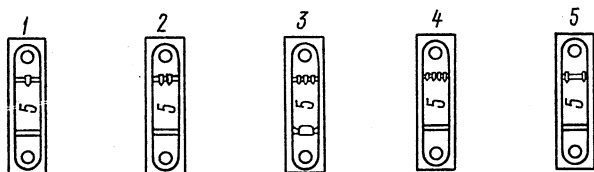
Marks on Main Bearing Caps (bearings are counted from engine front) and Cylinder Block Code Number
